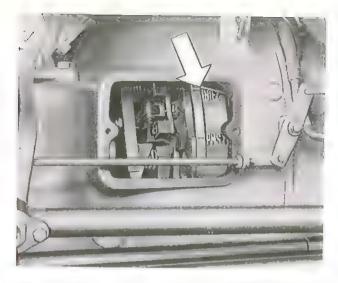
Reference mark on flywheel indicating injection advance (21° before T.D.C.).
